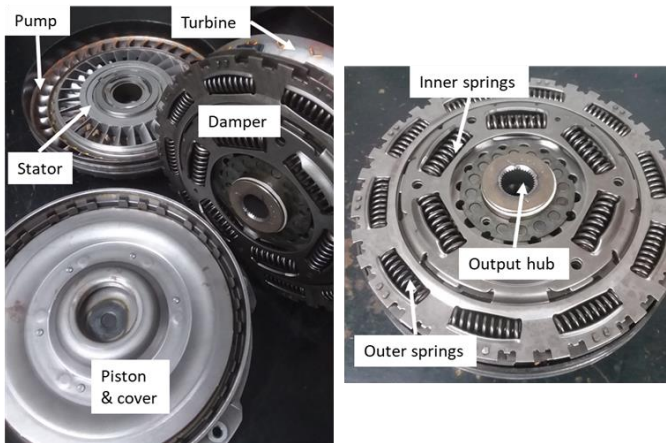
Disassembled (cut apart) torque converter showing torus, damper, clutch piston with pump cover (left), and close up view of series spring damper hardware (right).
